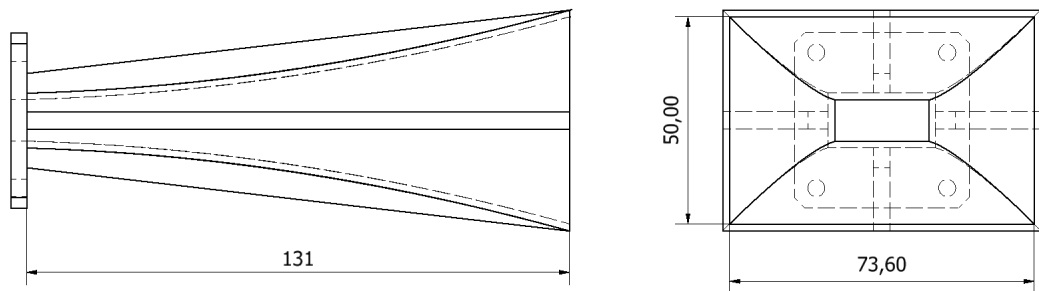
Technical drawing of the feed horn depicted in [Figure 16](#) with all measurements in millimeters.
